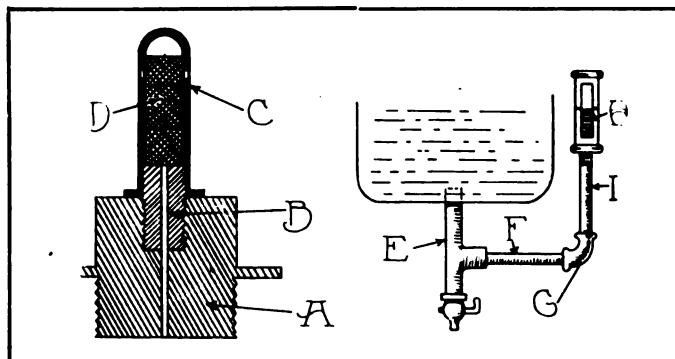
A, Device for Reducing Pressure in Differential Housing; B, Oil Gauge for Old Type Motor Crankcases.
